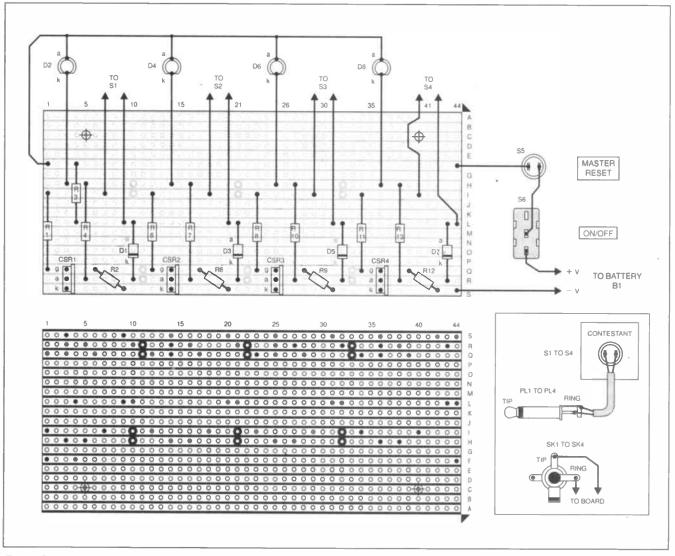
Stripboard component layout, interwiring details and underside copper tracks showing the necessary breaks in the strips. The preferred wiring to the jack sockets and plugs is shown inset.
